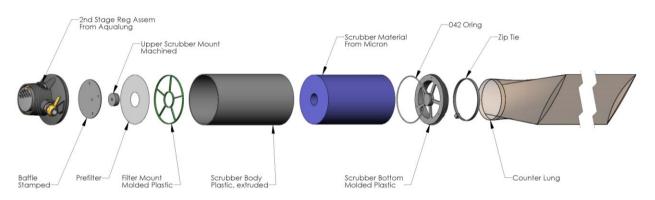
The Scrubber Assembly Includes The Integral Second Stage Regulator
